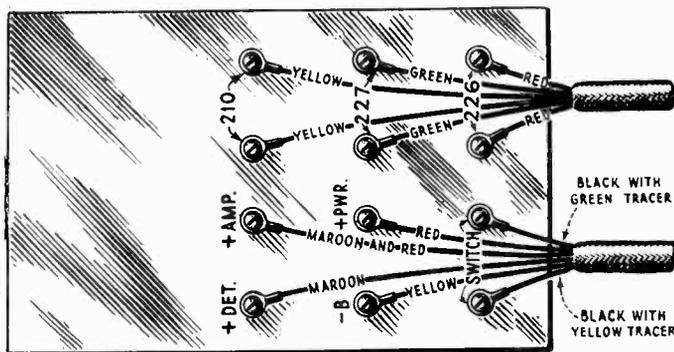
Sterling S. P. U. terminal board showing color scheme of connections
